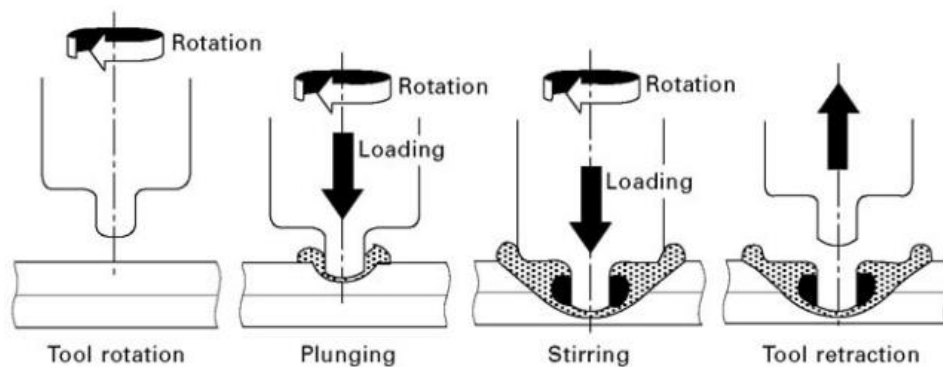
Friction Stir Spot Welding process [8]
